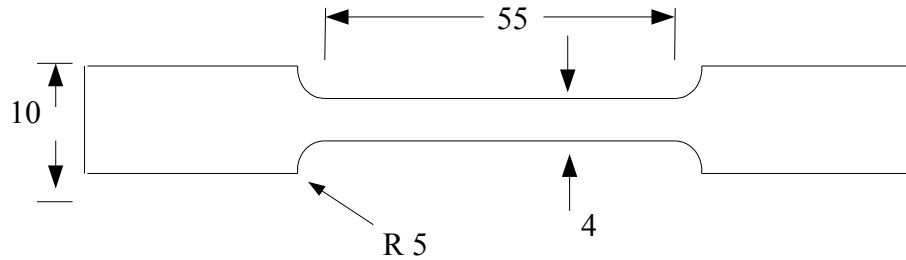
Schematic of the die used to cut tensile samples from green strip (dimensions in mm).
